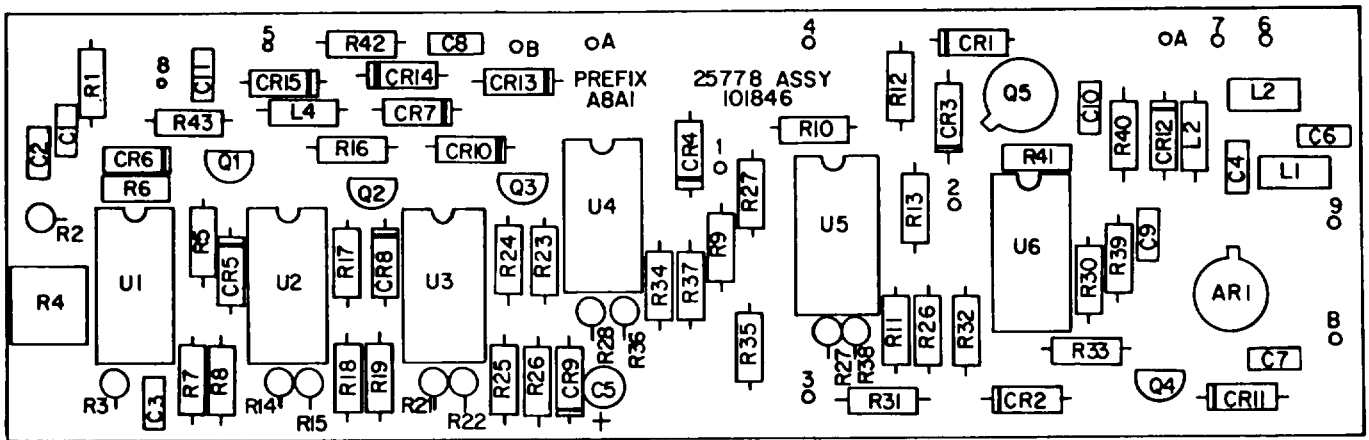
Fixed Oscillator Divider Assembly A8—cover removed.
